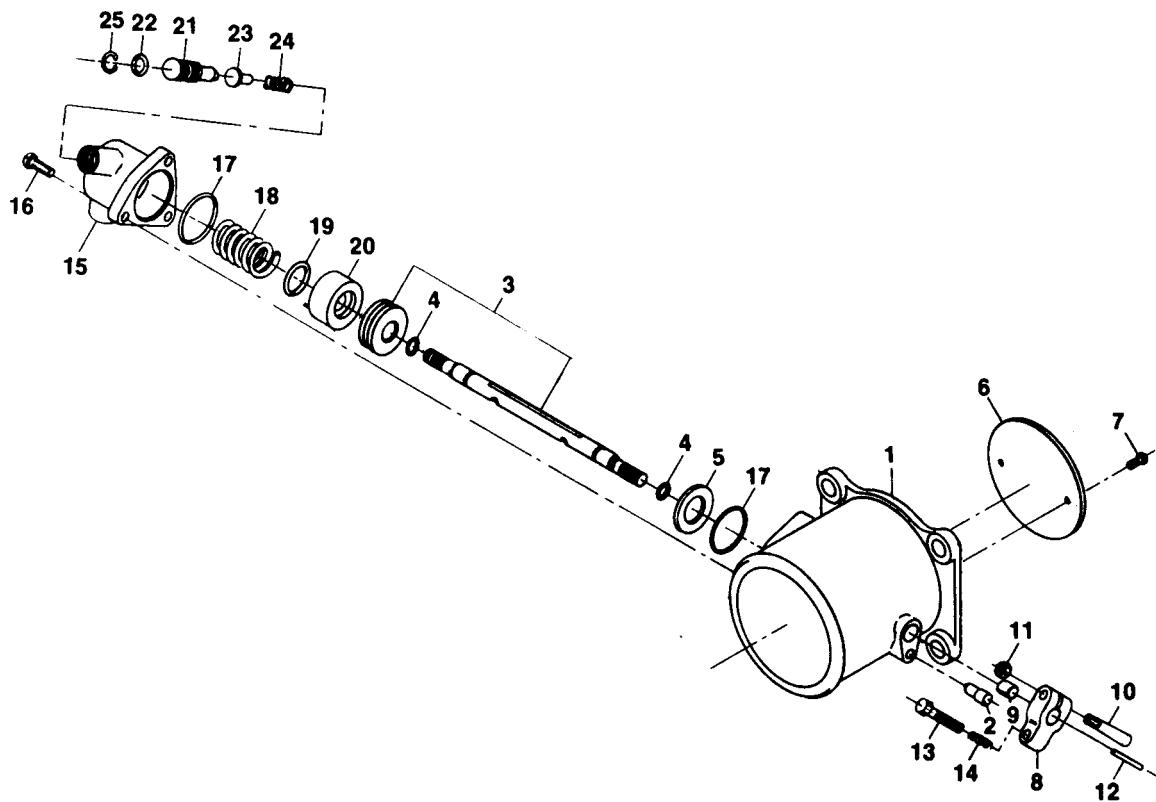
B. THROTTLE ASSEMBLY I0-550-C
